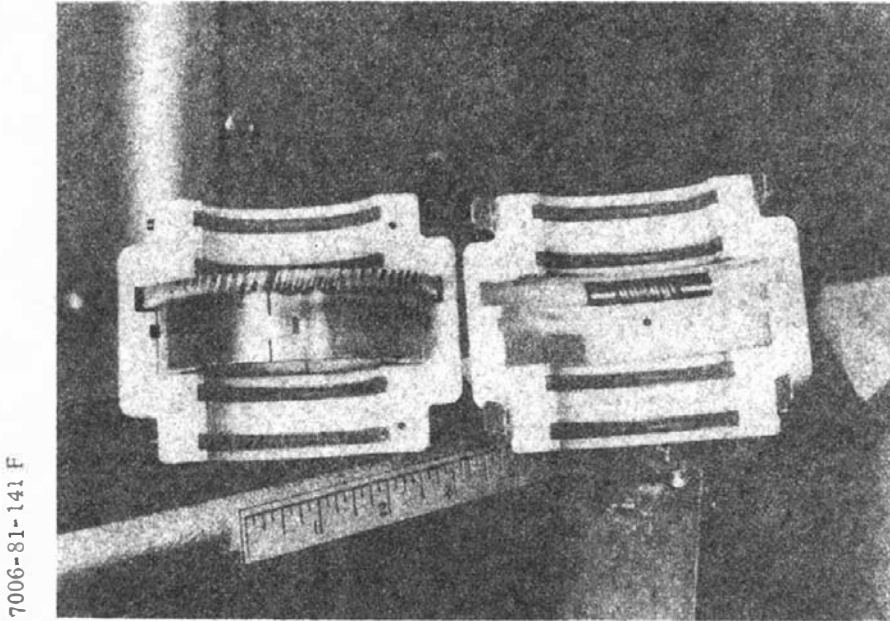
Internal Mechanism of Miniature Tube Welder
